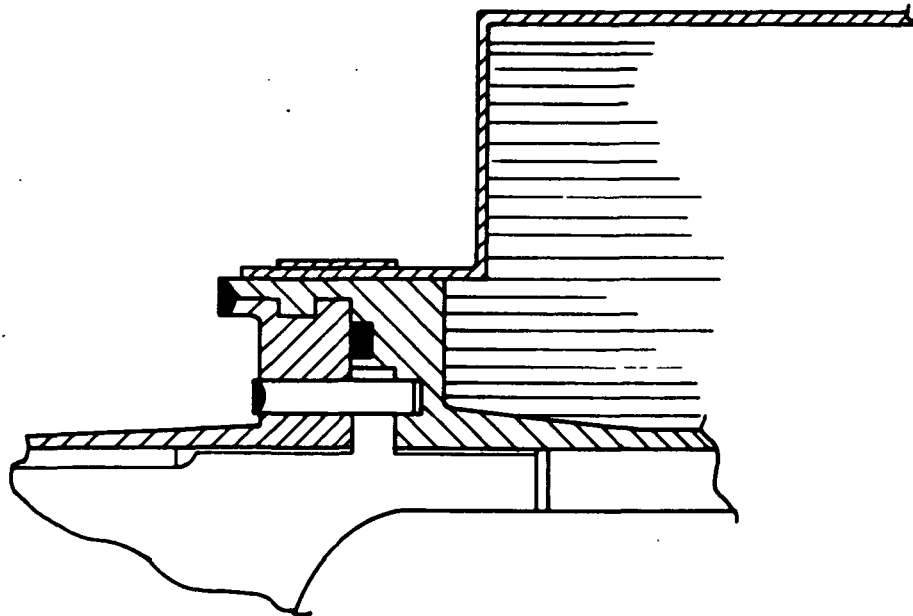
Removable Split Ring Fixture -- Hot Displacer
